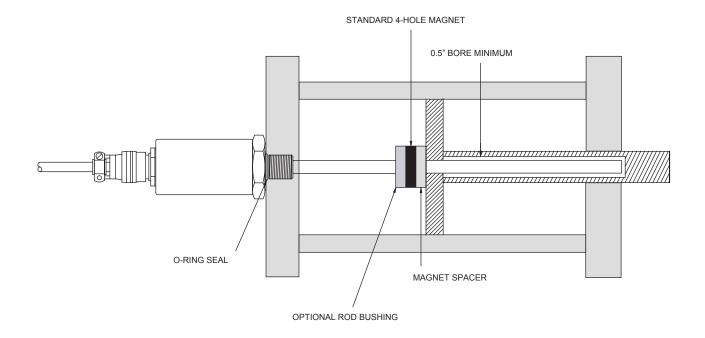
Mounting LDT in a Hydraulic Cylinder
